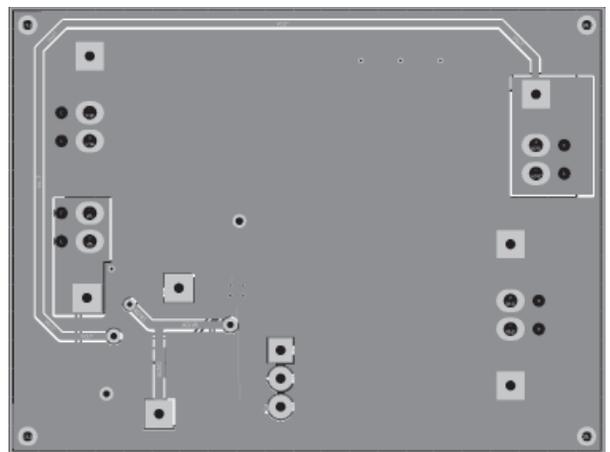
AAT1161 Evaluation Board Bottom Side Layout.
